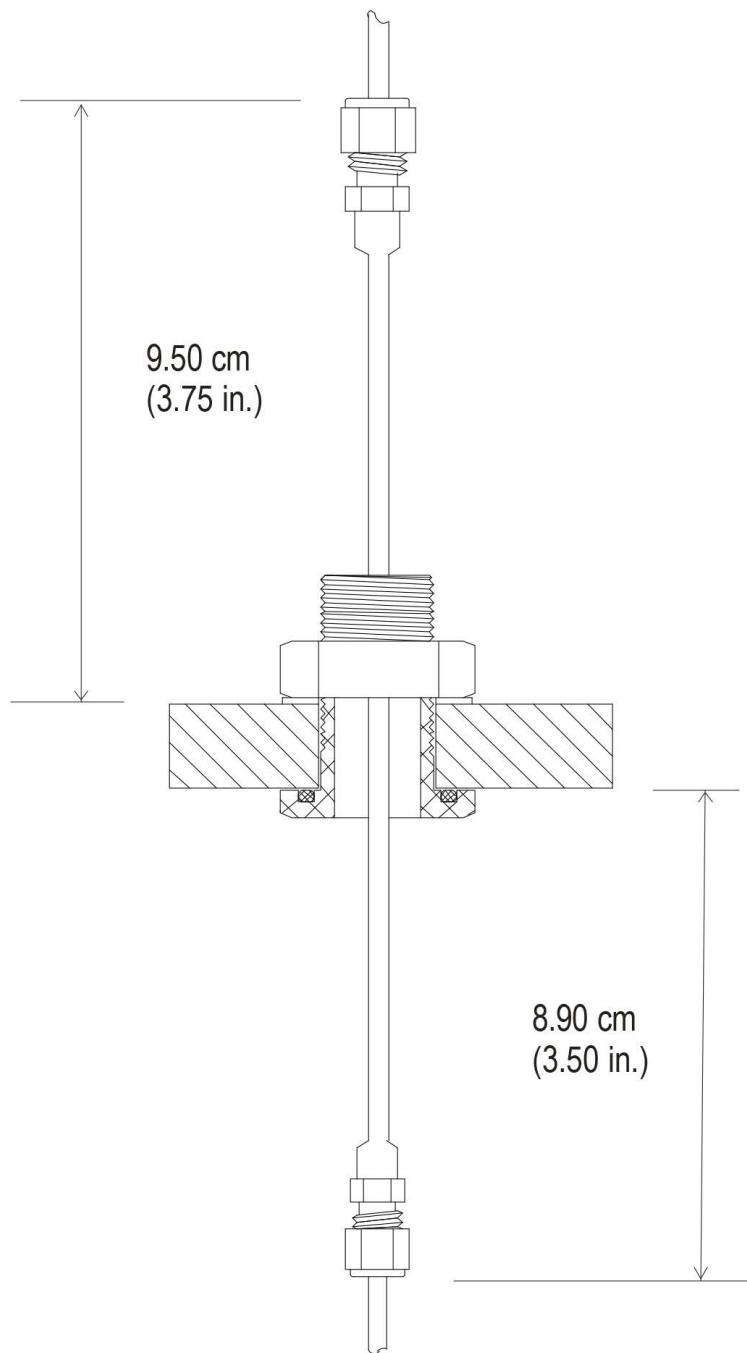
1" diameter bolt-hole gas feedthrough dimensions.
